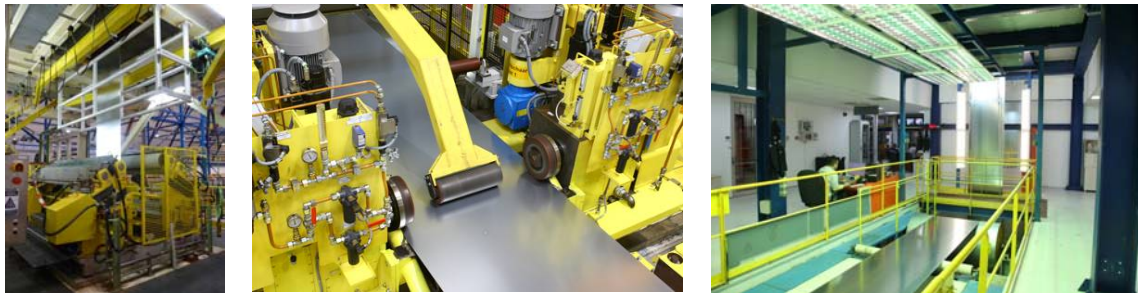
Roll coater, side-trimmer and inspection station.
